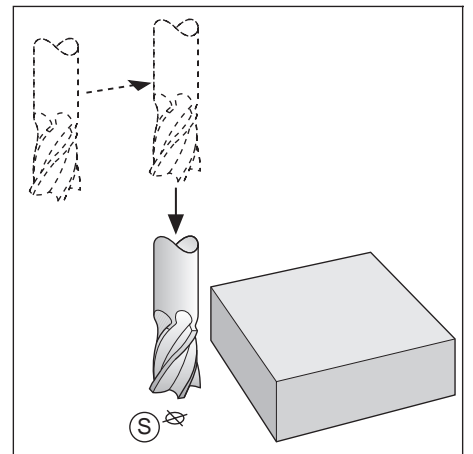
Move the spindle axis separately if there is any danger of collision
